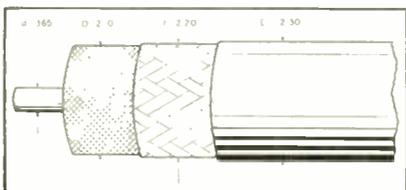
Using a No. 00 AWG inner conductor the overall cable dimensions increase (see text).
